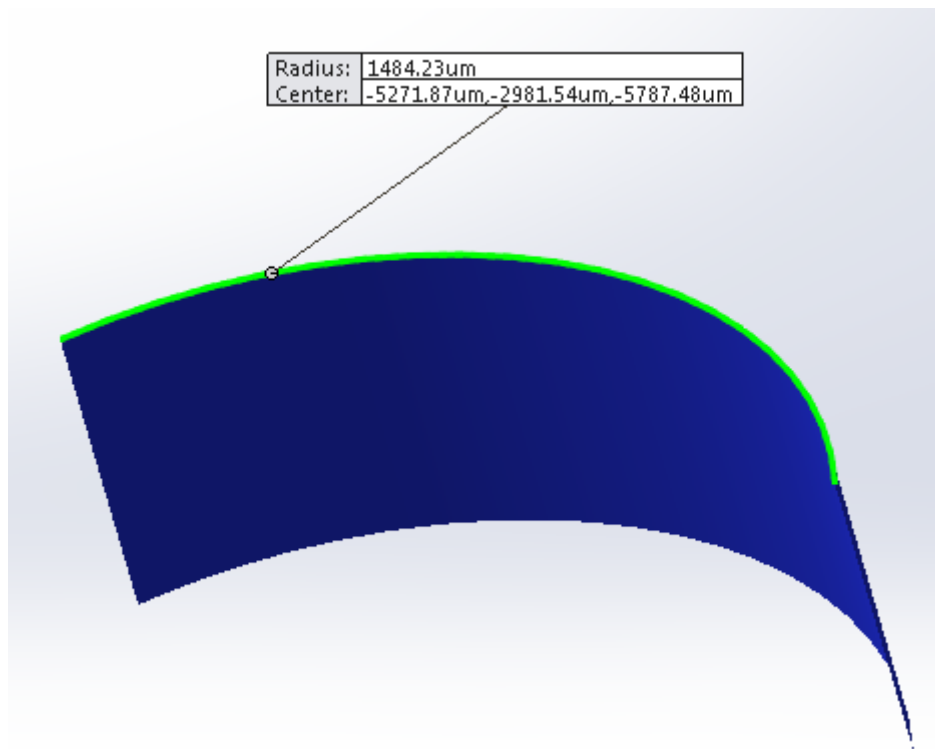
Radius of the constructed part cylinder. It is same as caliper reading.
